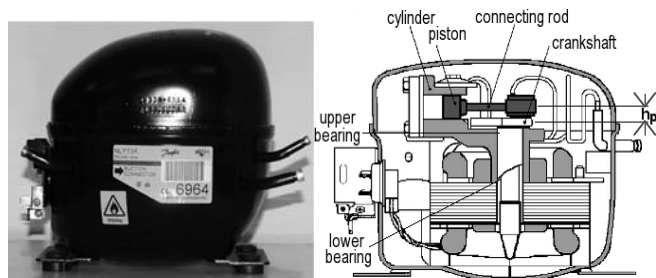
Picture and schematic draw of a hermetic reciprocating compressor.
